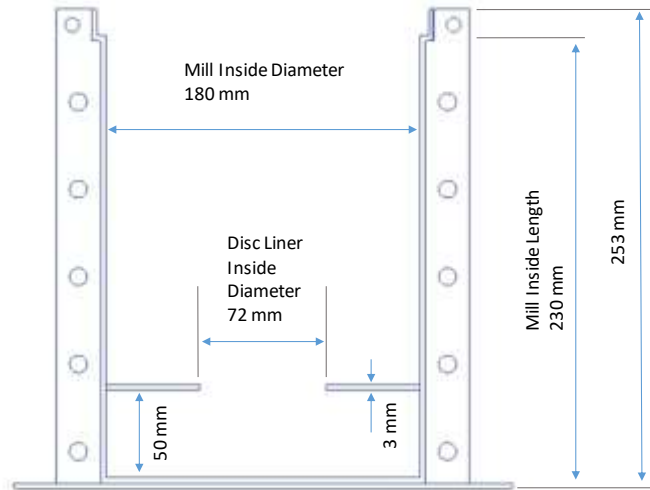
Cross section drawing of disc mill vessel showing dimensions
